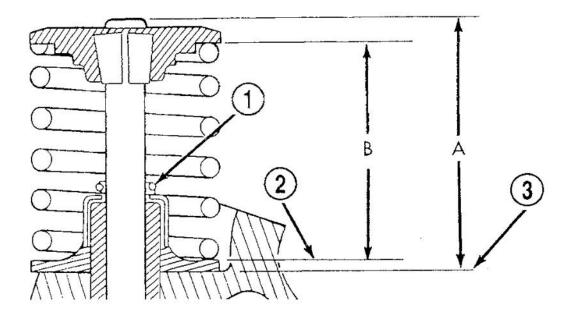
Identifying Valve Stem Oil Seal Tool Courtesy of DAIMLERCHRYSLER CORP.
